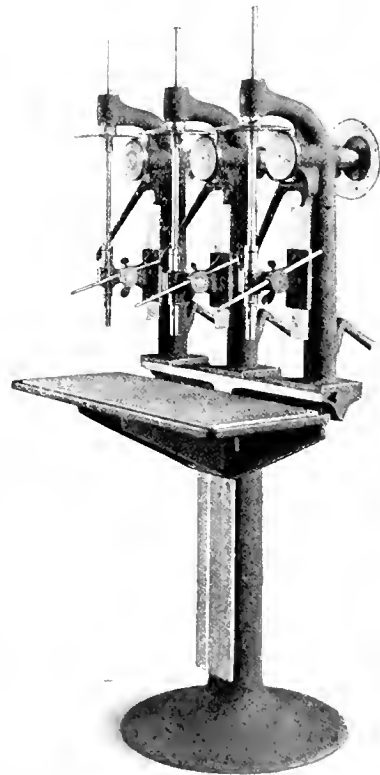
Multiple Spindle Form of the Machine, with the Columns Adjustable for Center Distance.
